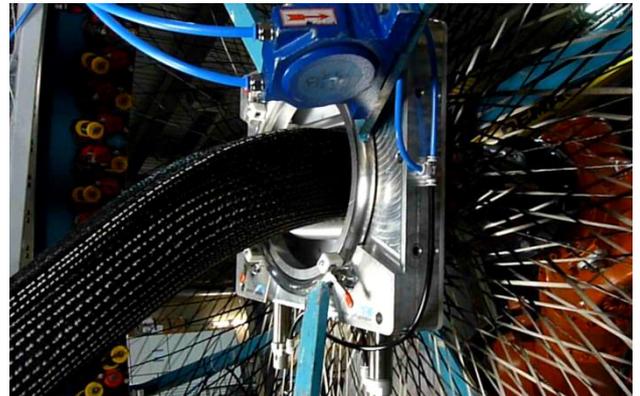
Pressure roll mechanism integrated into a radial braiding machine
